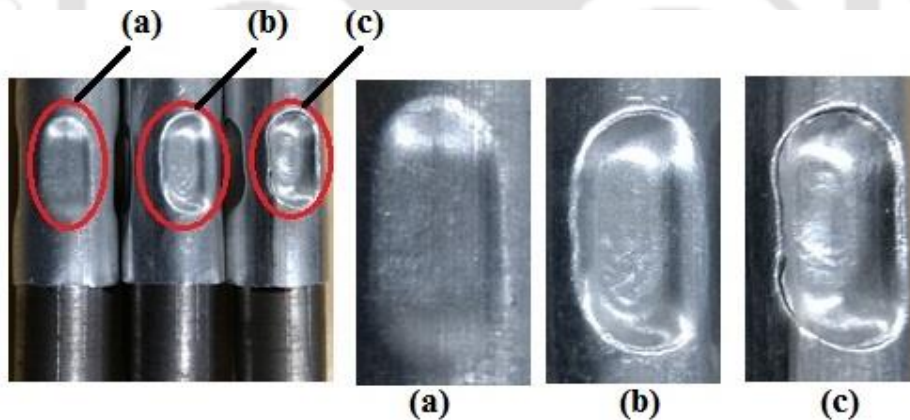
10 Tube shearing at groove edge for (a) 1 mm (b) 2 mm and (c) 3 mm groove depth
